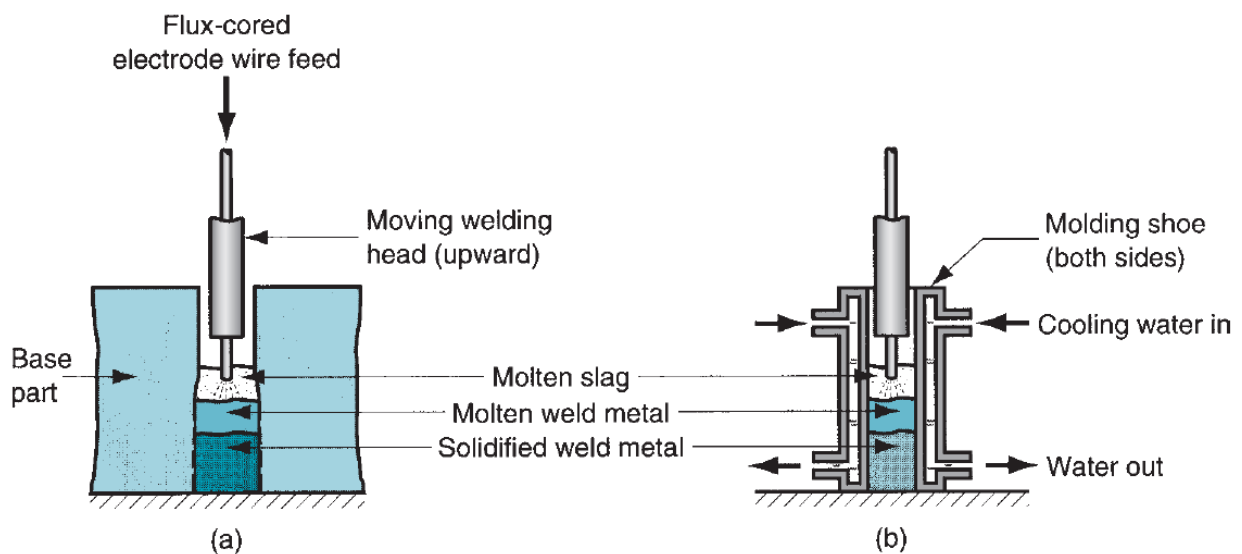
Electrogas welding using flux-cored electrode wire: (a) front view with molding shoe removed for clarity, and (b) side view showing molding shoes on both sides.
